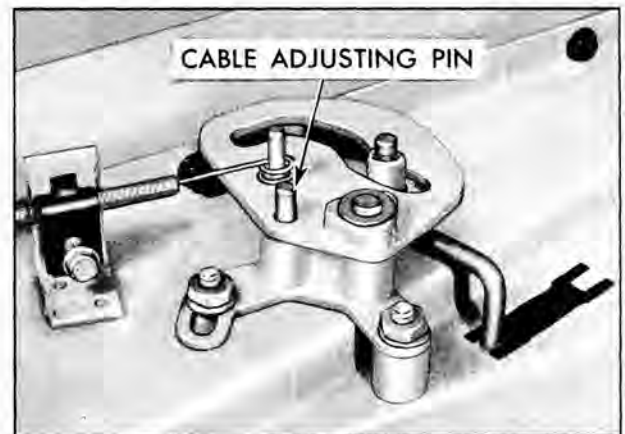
Temperature Control Cable Adjusting Pin in Position
